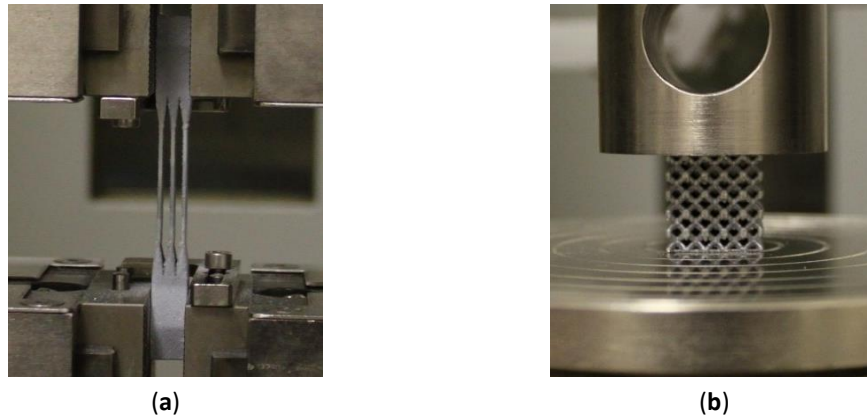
Mechanical testing using Zwick Z020 machine (a) tensile test, (b) compression test
